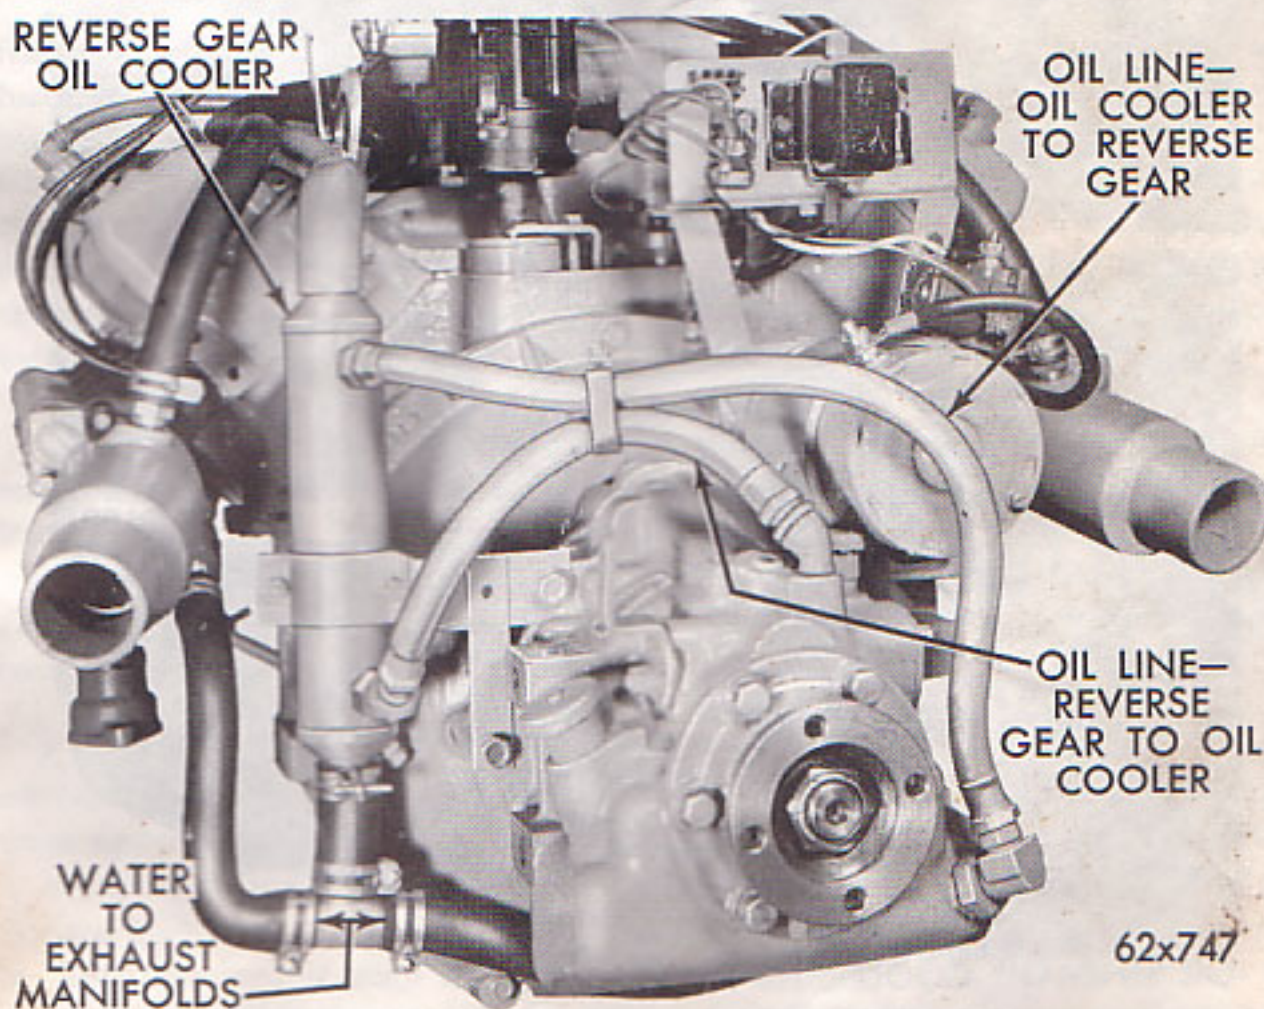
Reverse Gear Oil Cooler Connections Models 318
